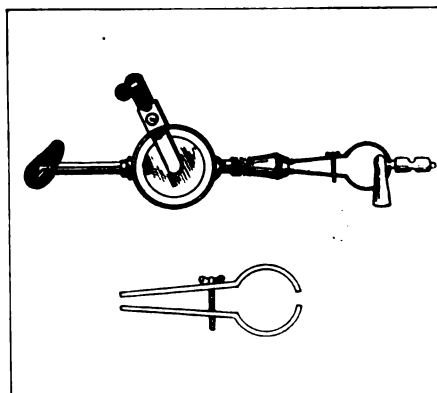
A Tool Designed to Facilitate the Labor of Grinding in Petcocks. Showing the Tool Separate and Assembled in a Breast Drill.
